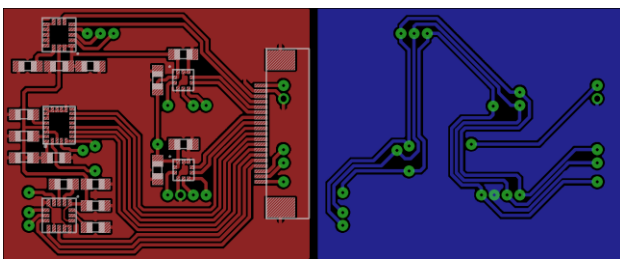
IMU PCB layout, 1 layer (red) - 2 layer (blue)
